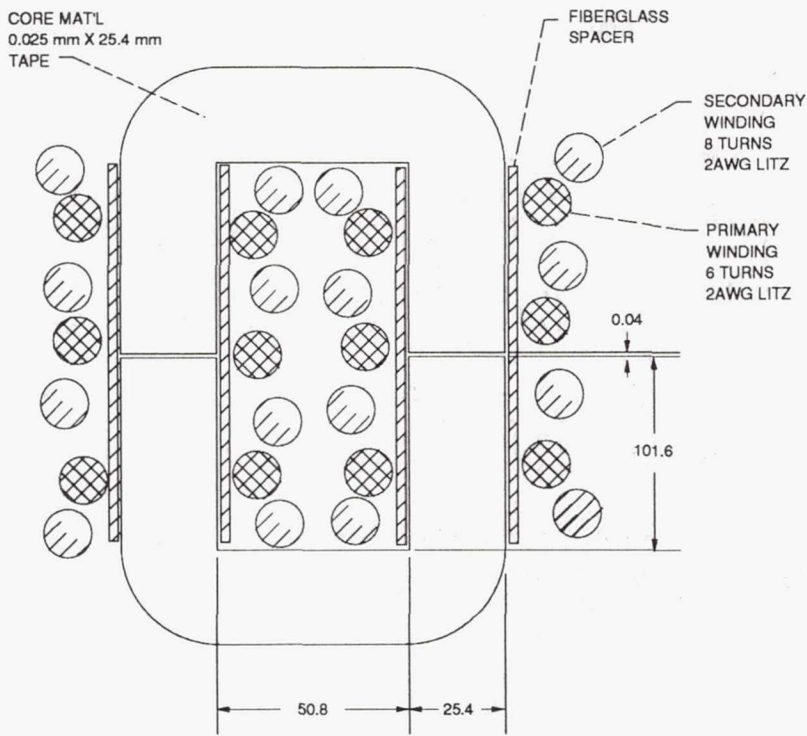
Power transformer cross section. All dimensions are in millimeters.
